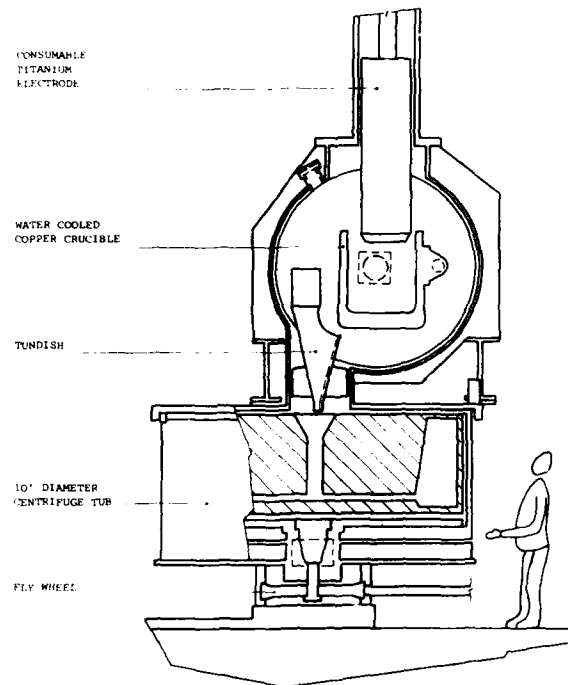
Diagram of centrifugal casting furnace used for making titanium castings
